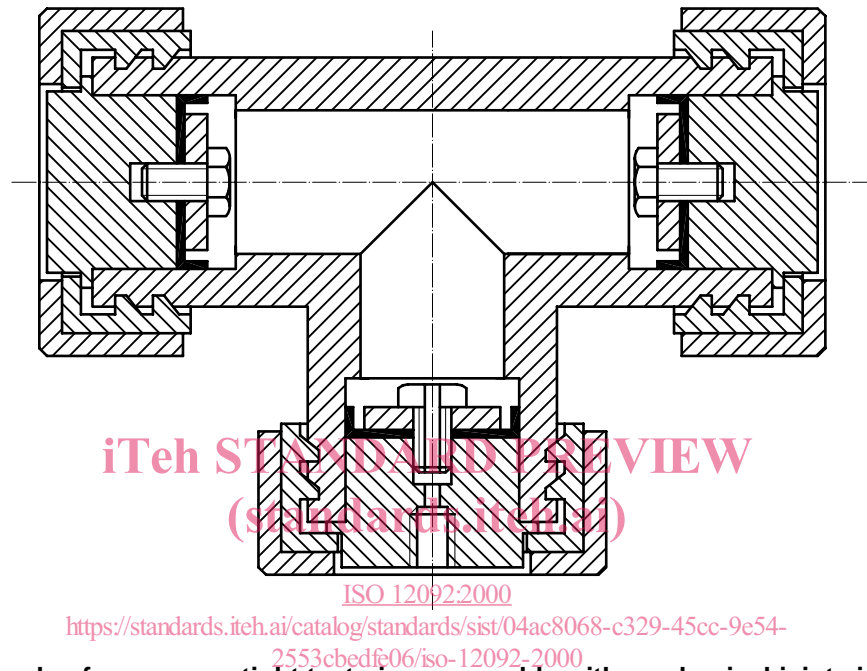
Example of a pressure-tight test piece assembly with solvent adhesive joints and with hydrostatic end thrust
